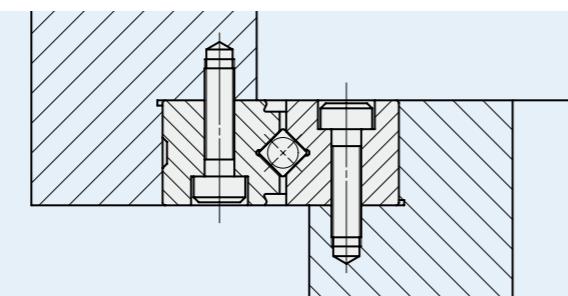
Example of mounting to the housing of Mounting Holed Type High Rigidity Crossed Roller Bearing
